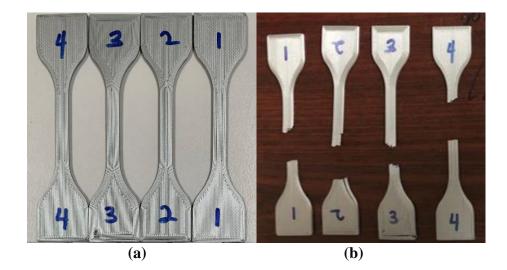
Examples of (a) before and (b) after the tensile test for PLA/Aluminium printed samples with different printing parameters
